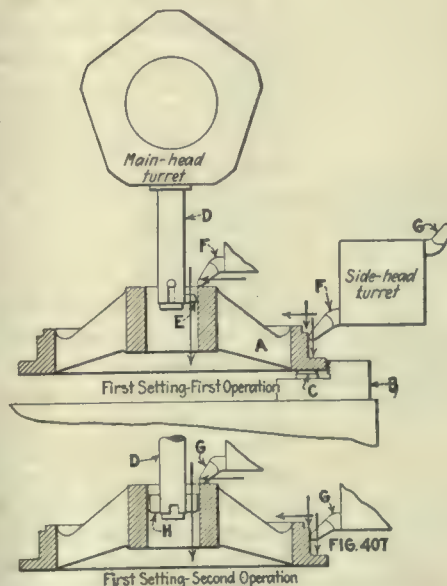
TOOL LAYOUT USING STANDARD EQUIPMENT
